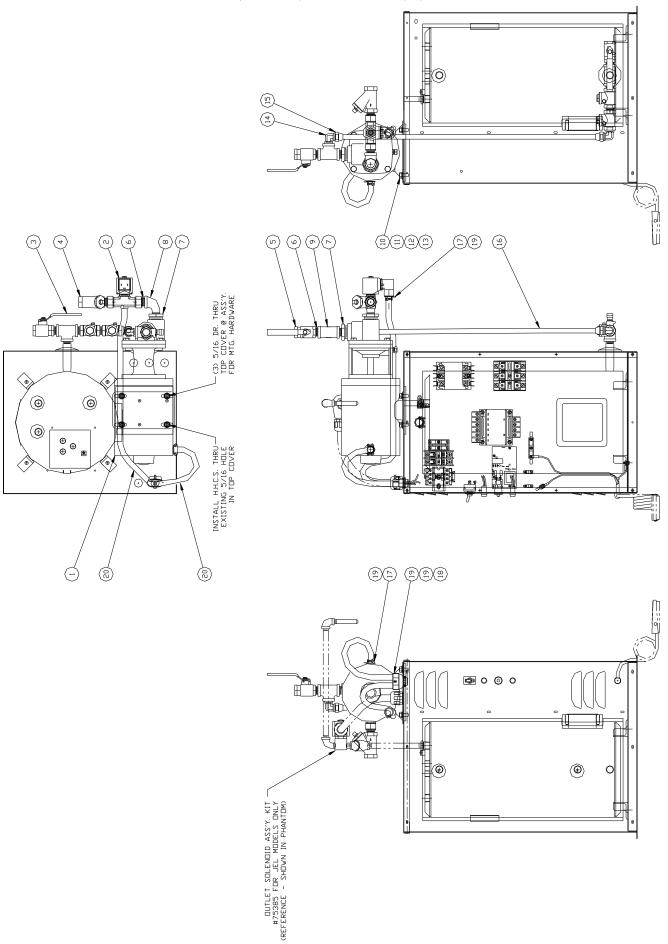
73529 (rev B) Water Pump Assembly Kit Single Phase, RHPG/ JEL 6, 9, & 12 KW
